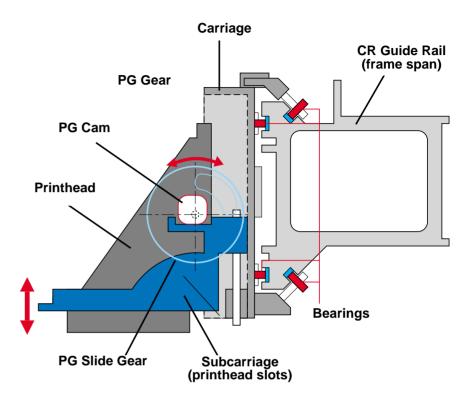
Carriage Mechanism & CR Guide Rail (View from the printer's right side)
